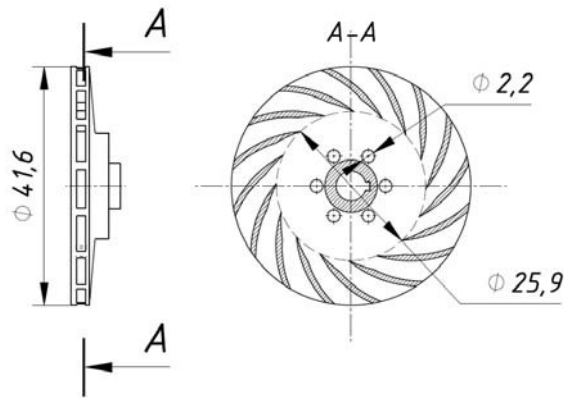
Impeller with sixteen blades. The blades are shortened in comparison to the ones of a standard impeller
